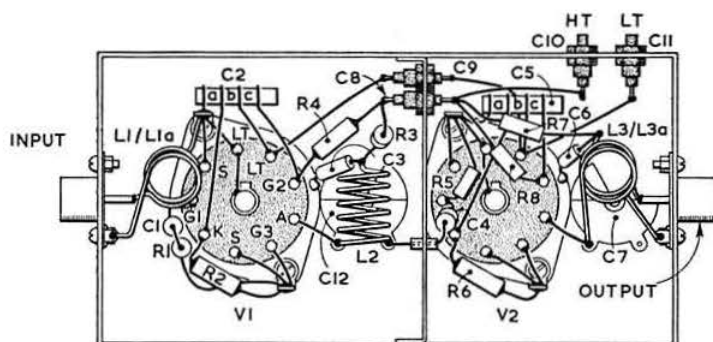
Layout of the buffer amplifier. The copper or brass chassis measures 6 in. by 3 in. and has a bottom cover plate.
